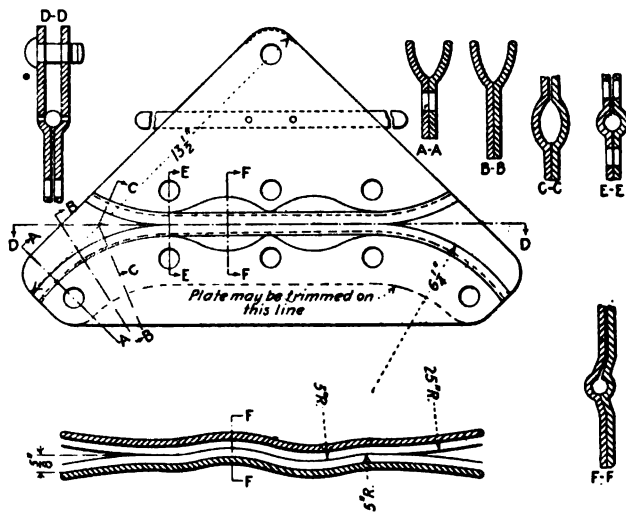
MISSISSIPPI RIVER POWER CO. CONDUCTOR CABLE CLAMP
